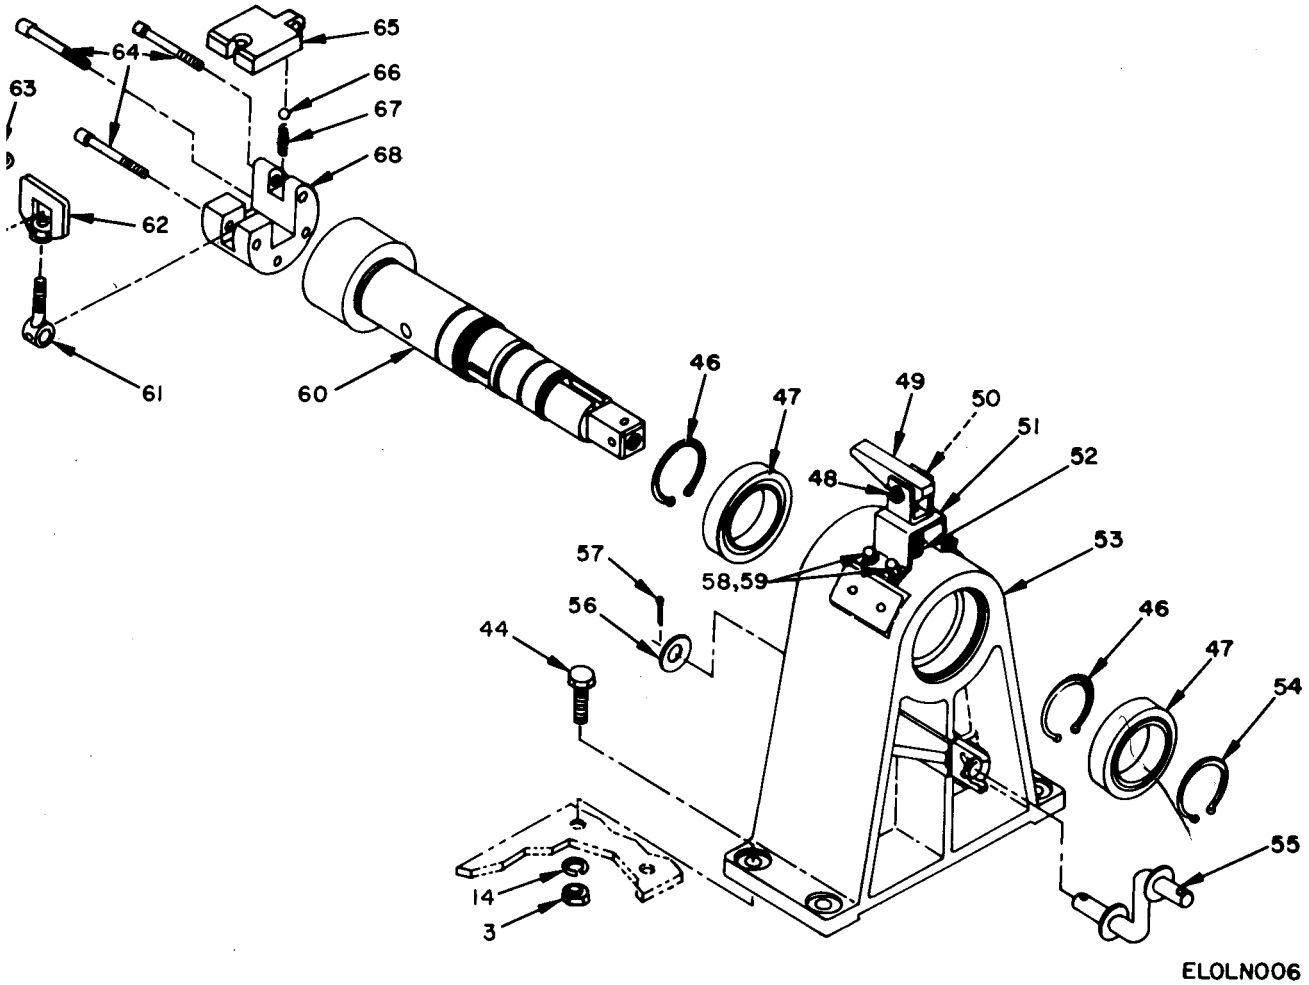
Clutch and Brake Assembly 1A1 (Sheet 2 of 2).
